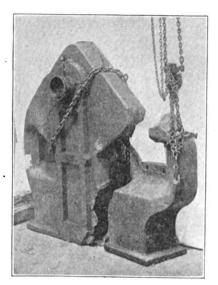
Immense Shear Casting Broken and Welded by the Gas Torch
